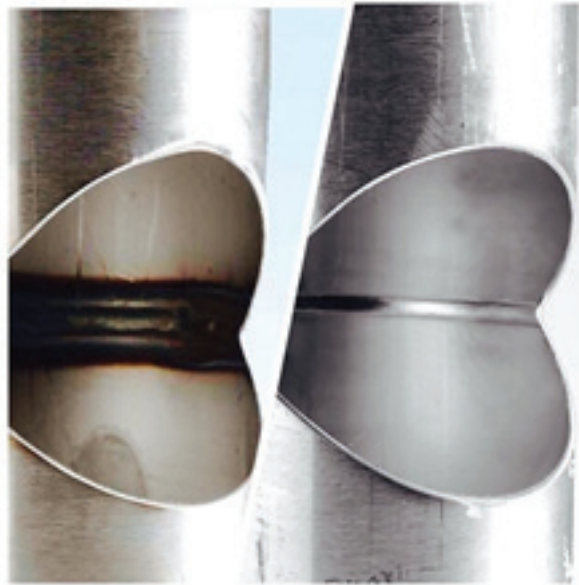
A bad weld on the left and a purged weld on the right
